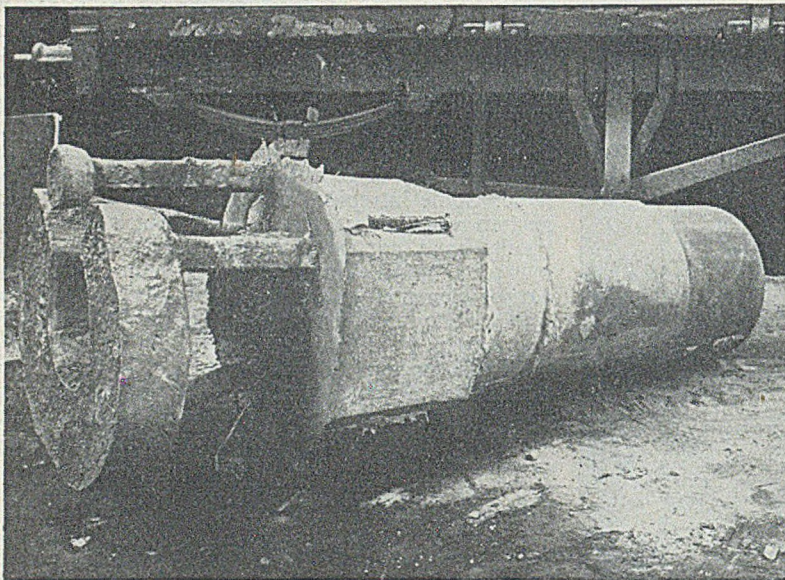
Large Top-poured Spheroidal-graphite Iron Casting of a Holder for a Centrifugal Casting Machine, replacing a Steel Casting.
